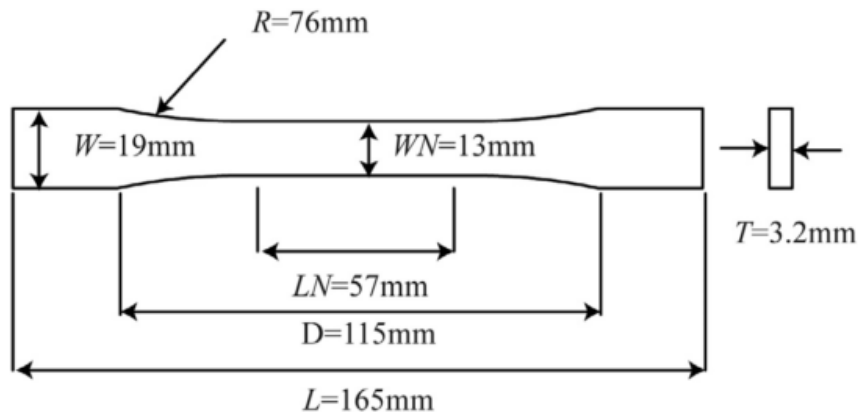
Nominal dimensions of the printed test specimens, according to ASTM D638 Type I geometry. [2]
